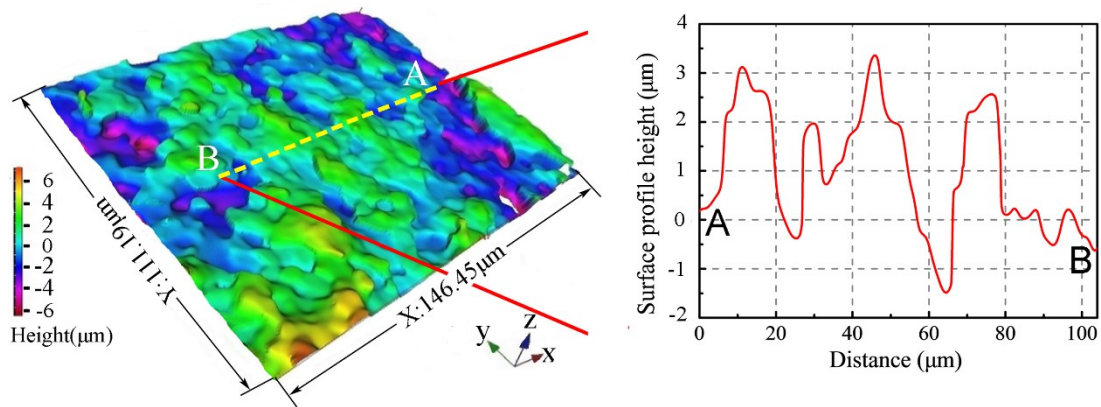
Surface topography and cross-sectional profile of the worn wheel edge after grinding
